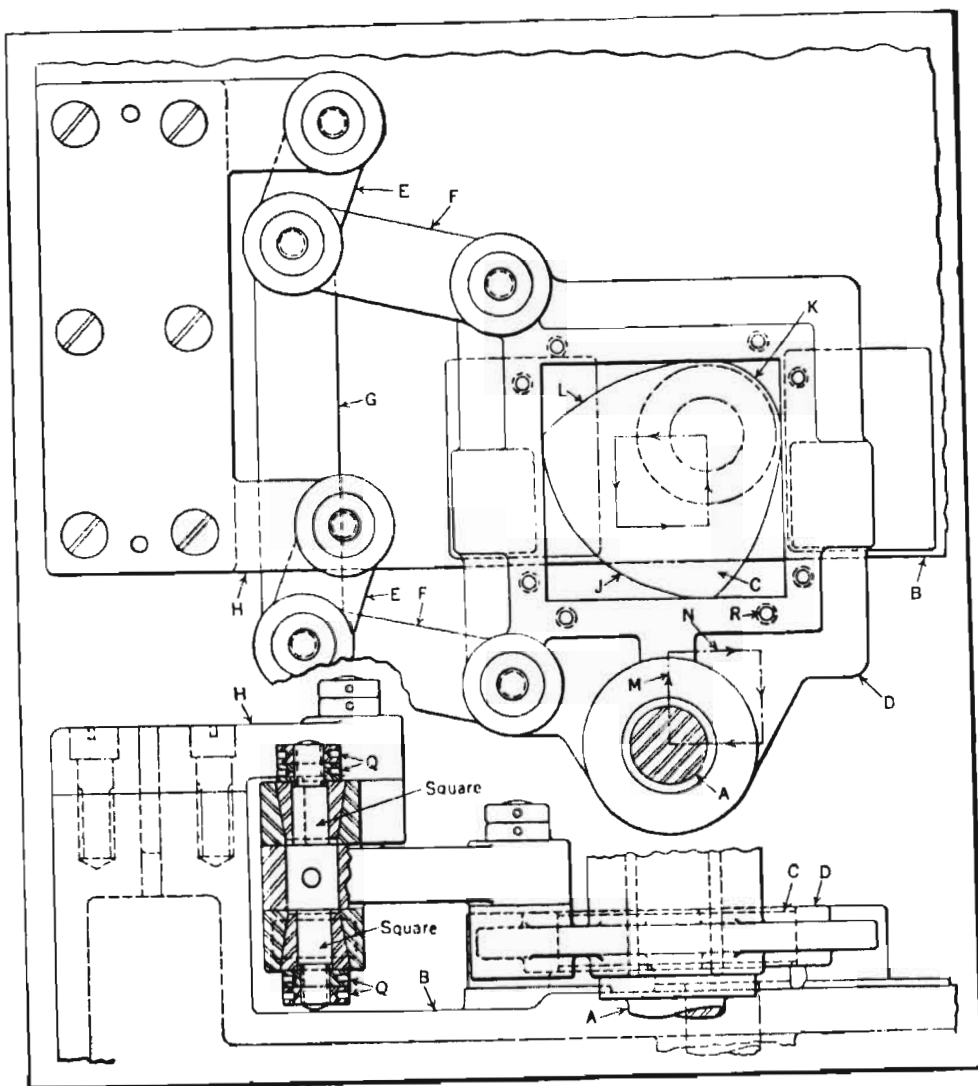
Mechanism for Guiding Tool along a Path of Square Outline
